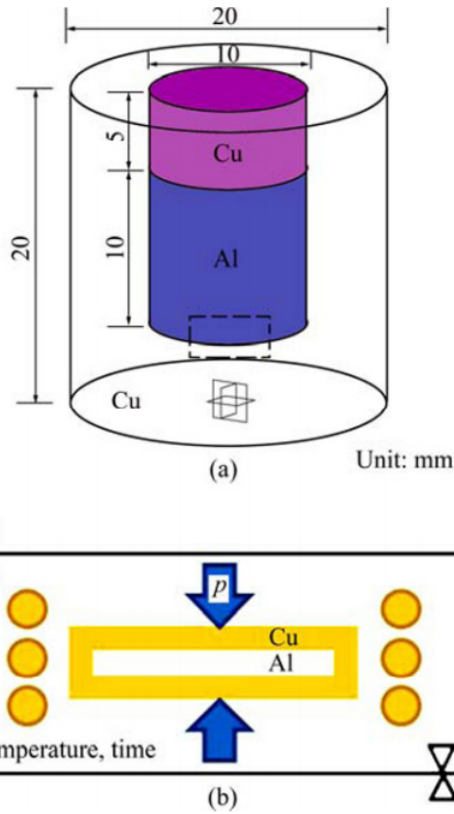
Diffusion welding schematic drawing. Al/Cu couple (a) and vacuum hot pressing (b)[24]
